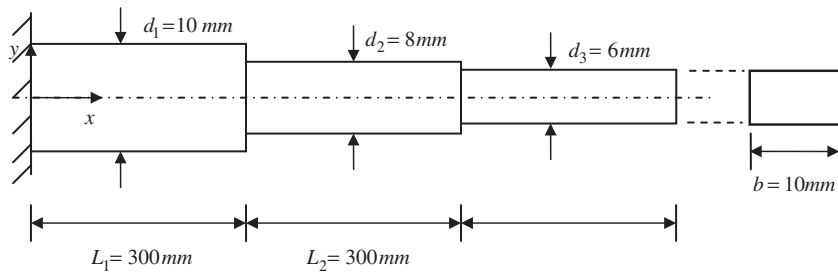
Sketch of the stepped cantilever beam (dimensions are not scaled).
